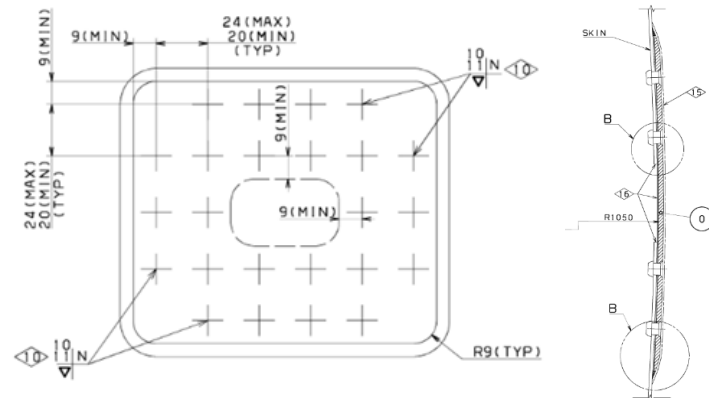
Extract of drawing of a typical bolted repair in a skin panel
